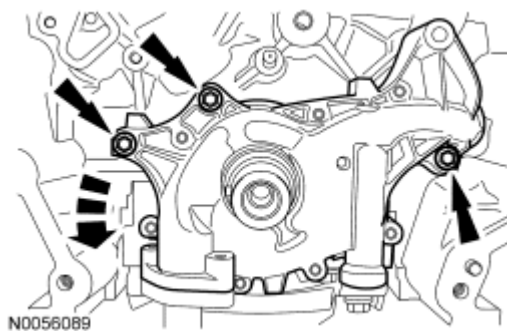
Locating Oil Pump Screen & Pickup Tube Bolts & Rotating Oil Pump Counterclockwise
